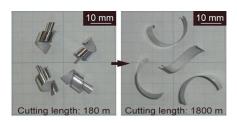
Shapes of removed chips after cutting when cutting length reached 180 m and 1800 m using virgin tool
